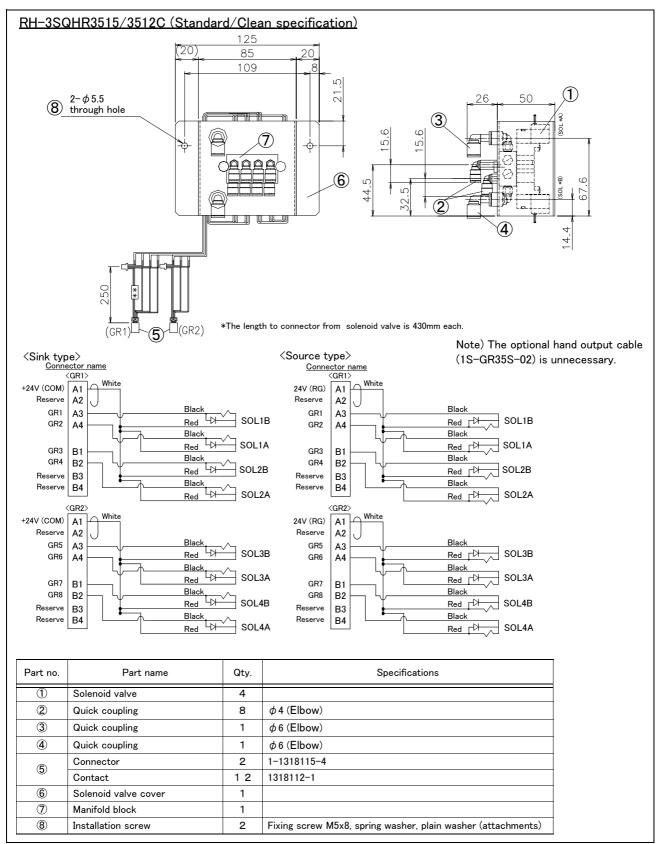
Outline dimensional drawing (RH-3SQHR series: Standard/Clean specification)
